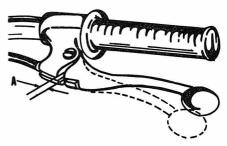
Adjust clutch cable to obtain 1/8 inch free play at pivot (A).
